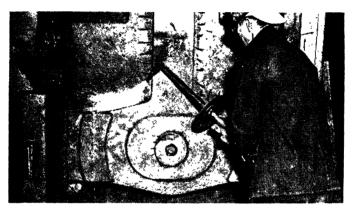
A powder cutting torch trimming a large casting. Note the heat shield on the torch
